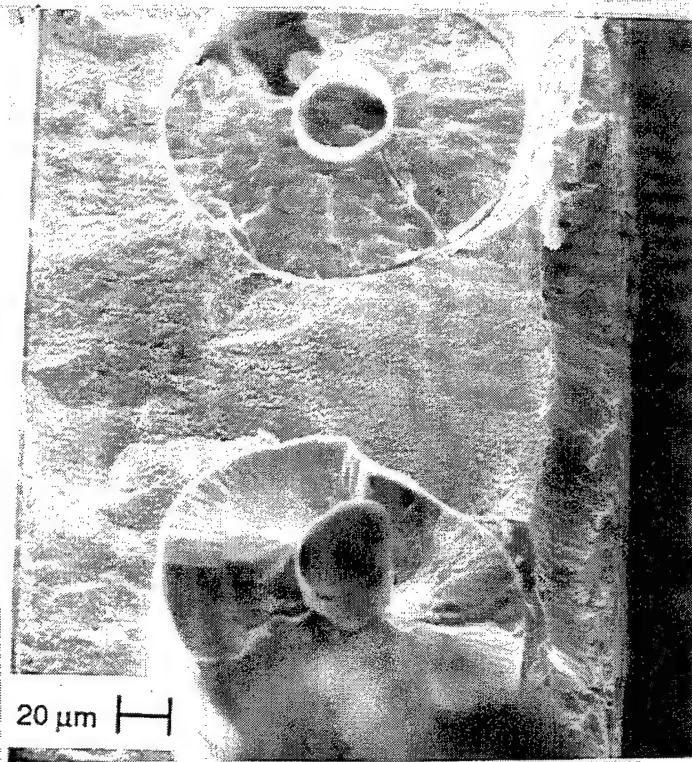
Thumbnail crack on 815°C fracture surface
